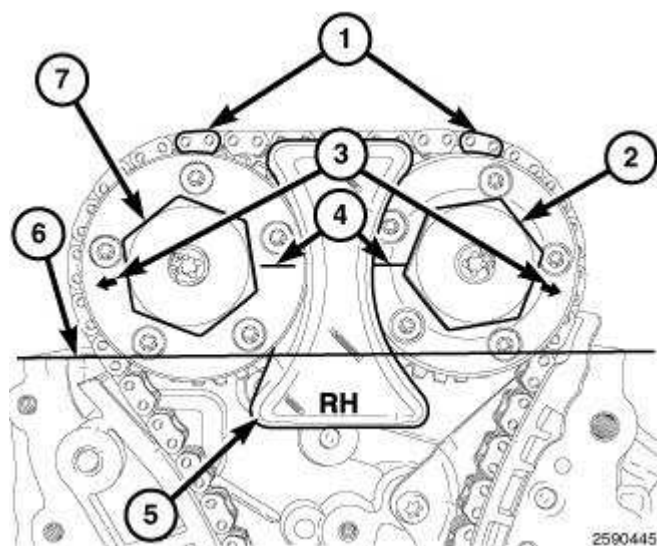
Phaser Timing Marks, Oil Control Valves & RH Camshaft Phaser Lock
